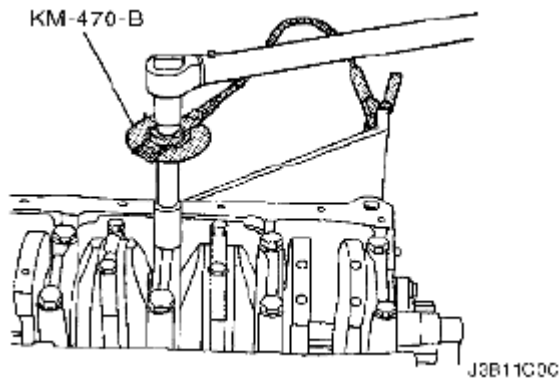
Installing Crankshaft Bearing Cap Bolts Using Angular Torque Gauge (KM-470-B)
